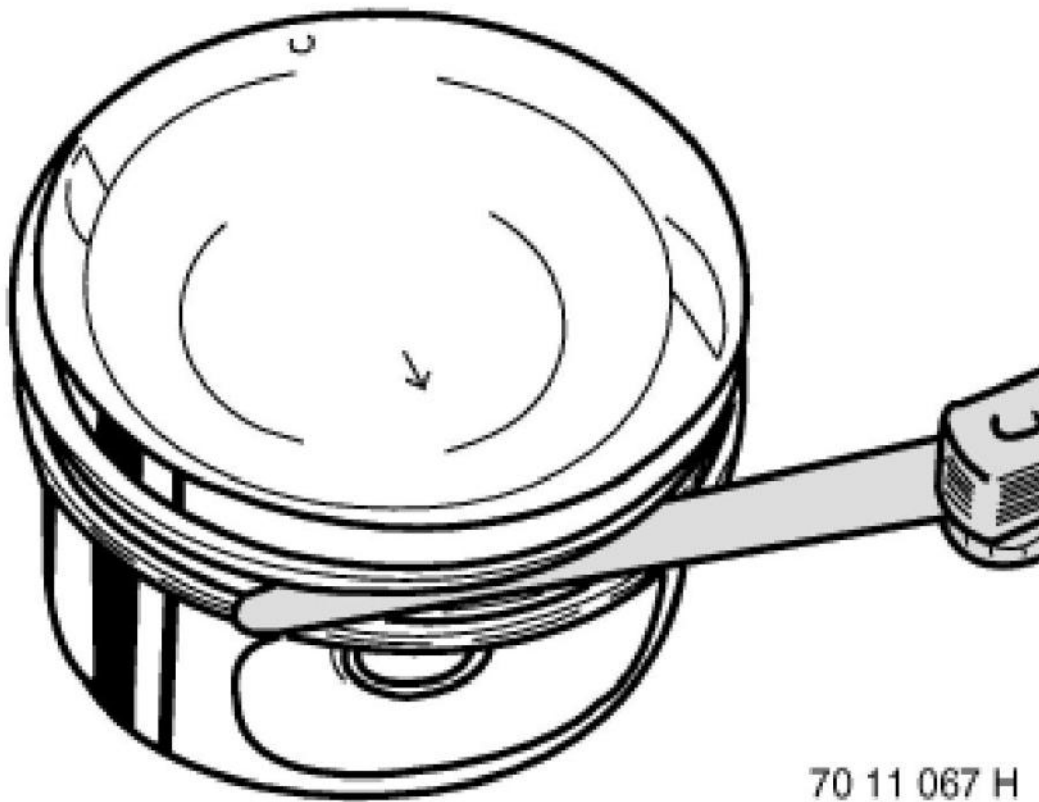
Measuring Axial Clearance Of Piston Rings In Piston Ring Groove
